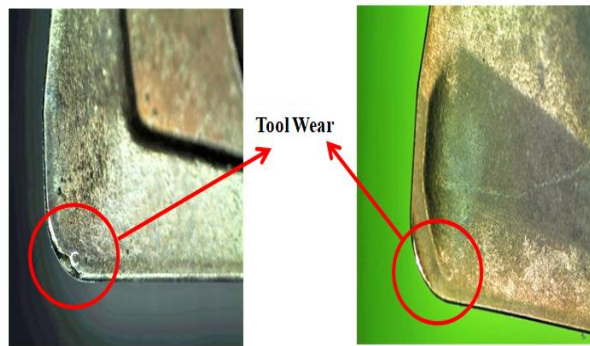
Optical microscope images of Tool wear during dry machining and modified Simarouba oil
